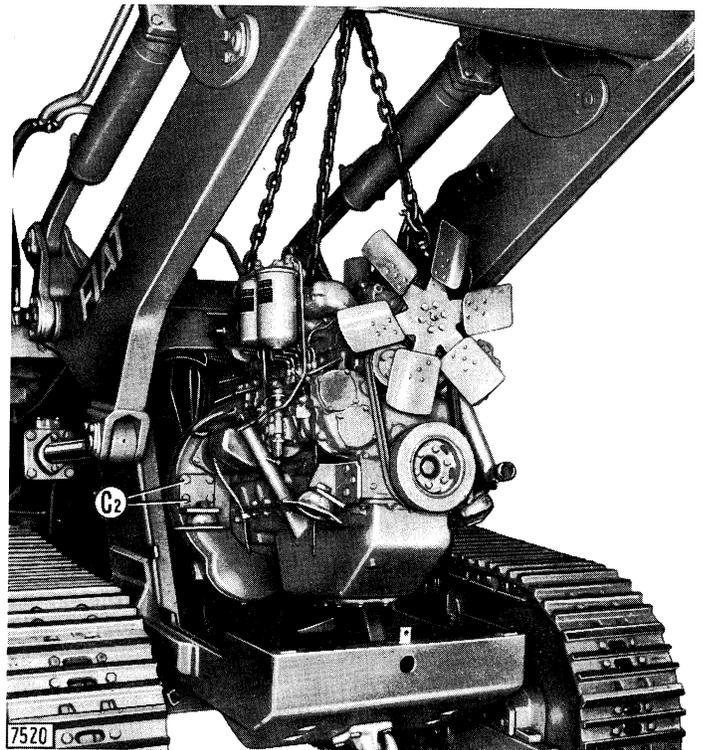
Removing (or Refitting) the Power Unit using Lifting Hook Part No. 290740
